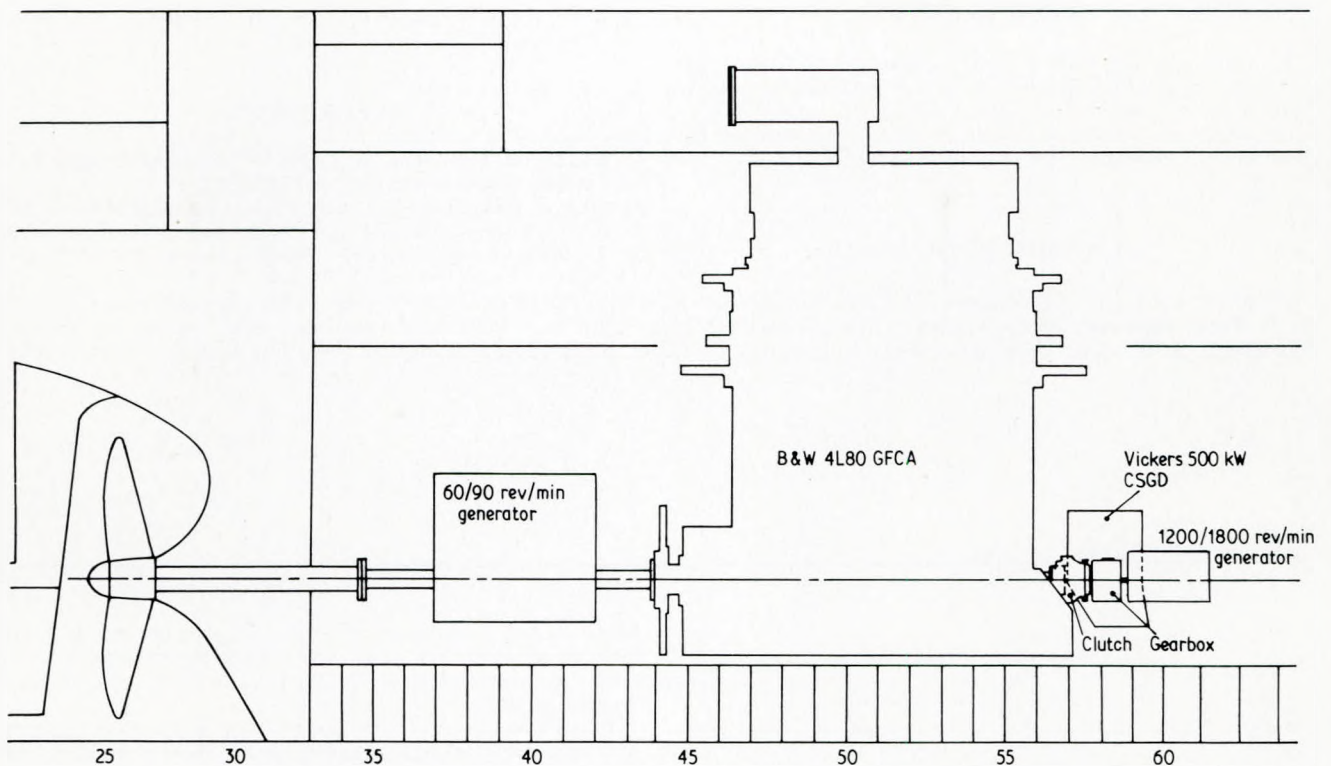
Assembly layout: the CSGD unit is shown superimposed on a typical arrangement
